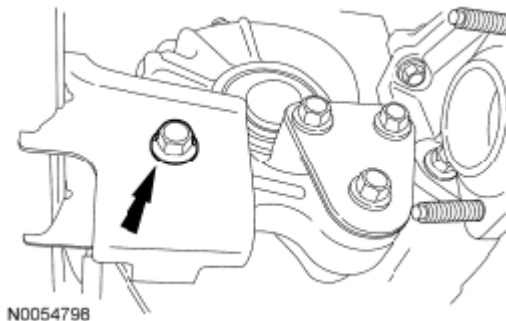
Locating Engine Roll Restrictor-To-Subframe Through Bolt
